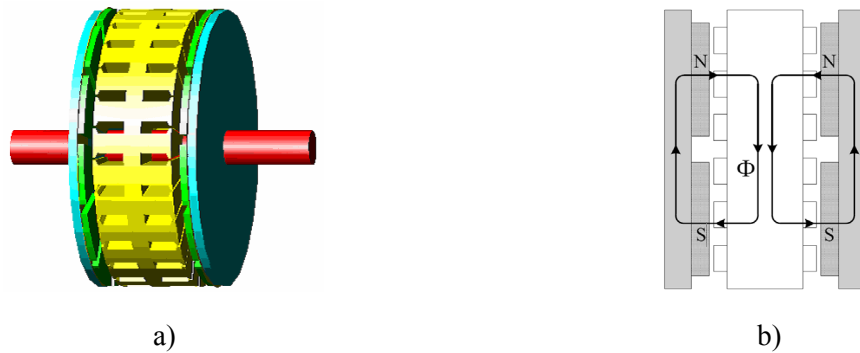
a) Slotted axial-flux surface-mounted PM machine with double rotor [Che 2005], b) Illustration of the flux direction.
